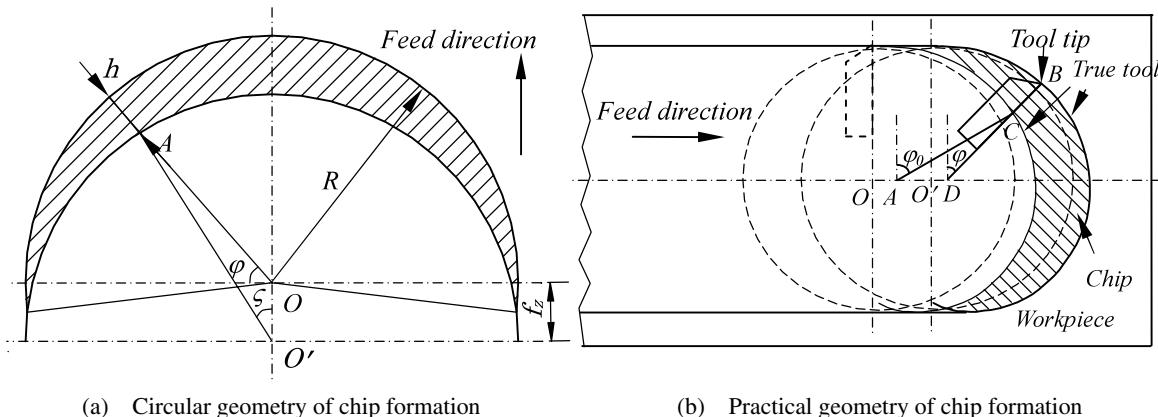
Geometry of chip thickness of the milling process. f_z is the feed rate (mm/rev-tooth); φ is the instantaneous angle of immersion; $R = D/2$, where D is the diameter of the cutter
